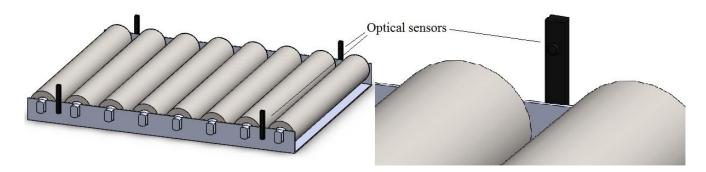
Thru-beam optical sensors mounted on the unloading conveyor
